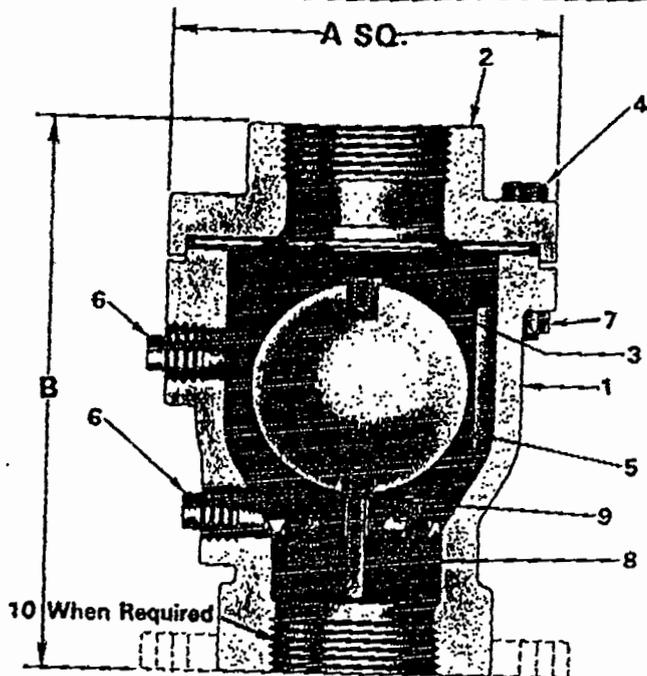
(4" Flange Dimension Per ANSI B16.1 Class 125 (CL.250 Optional))
